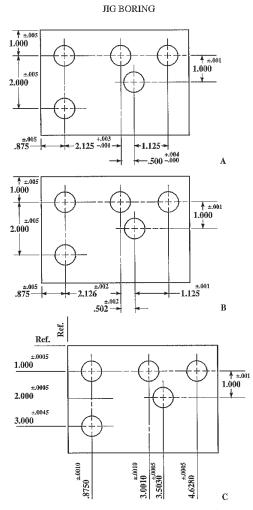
(A) Conventional Dimensions, Mixed Tolerances; (B) Conventional Dimensions, All Equal, Bilateral Tolerances; and (C) Coordinate Dimensions
